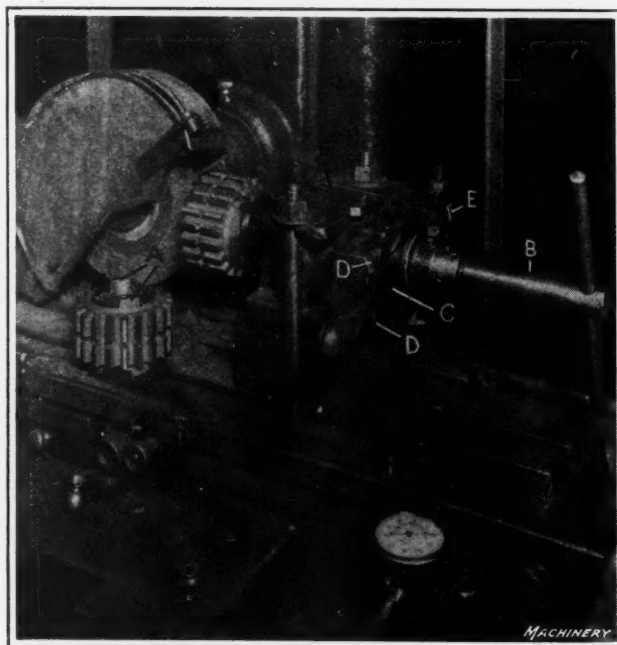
Indexing Fixture on Grinder for grinding Opposite Sides of Keys *A* on Crankshaft Gear
